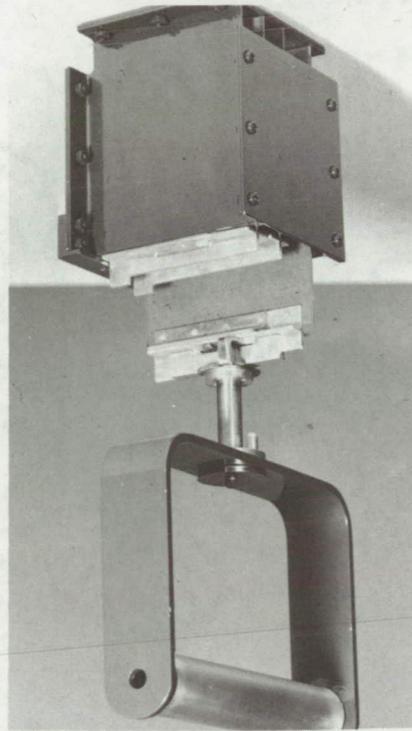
With tool locked by turning of the handle, a card is withdrawn; note the adapter.
